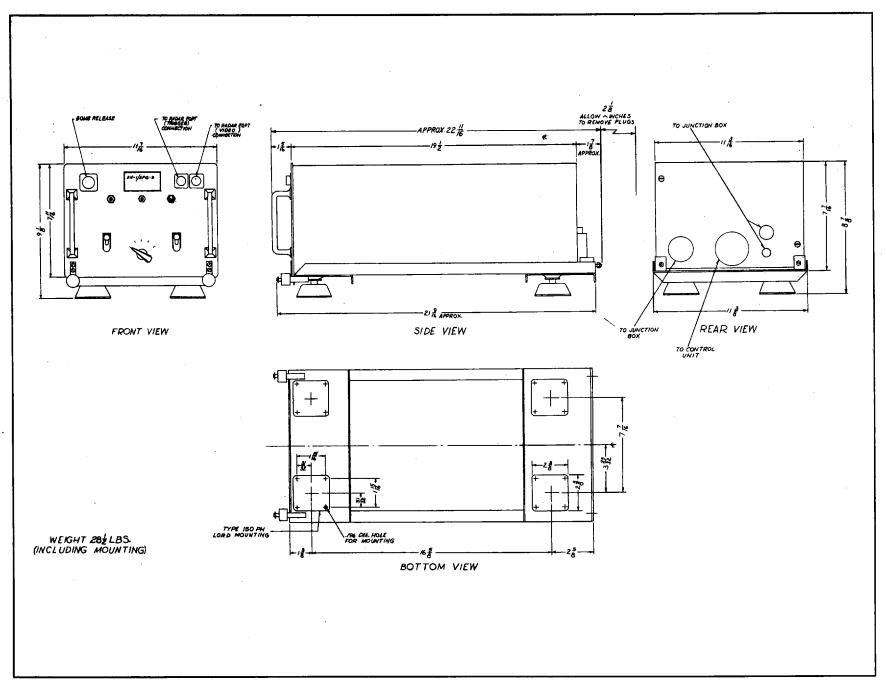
Synchronizer SN-1/APQ-5—Outline Dimensions
